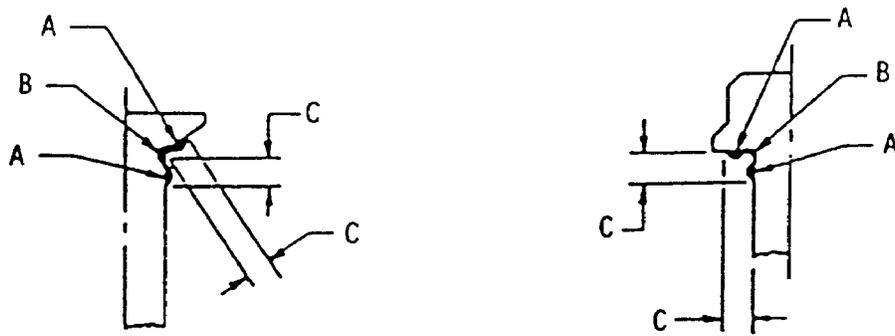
A - HEAD-TO-SHANK SECTION THROUGH FINISHED PART
